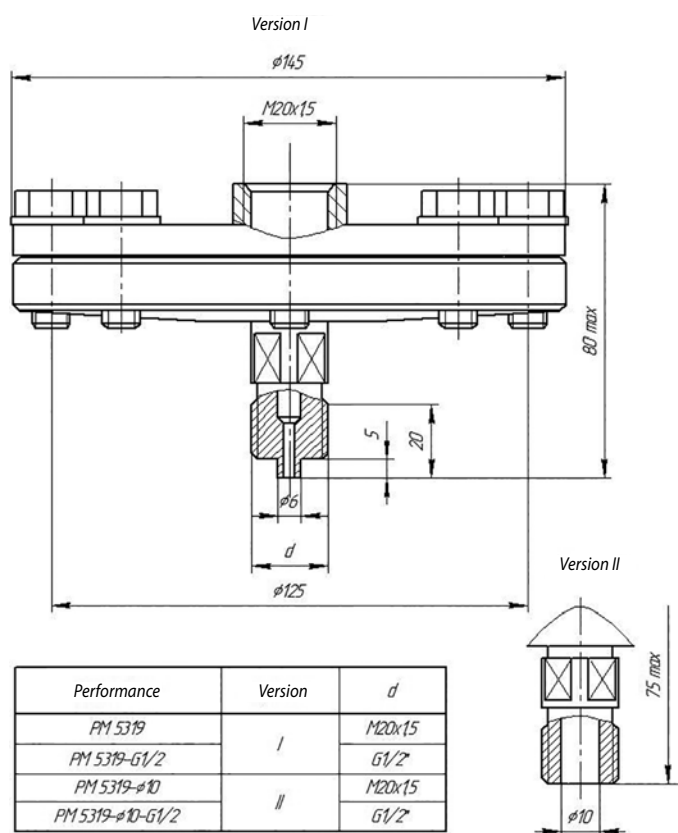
Structure, overall and attachment dimensions of PM 5319
